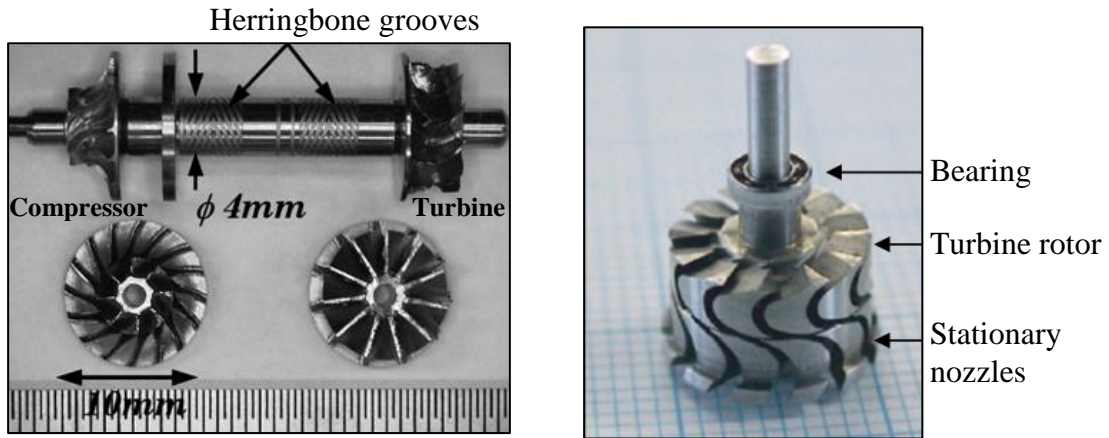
Pneumatically driven 5-axis milled (left) and EDM (right) turbine sub-assemblies employing conventional air and ball bearings, respectively.
